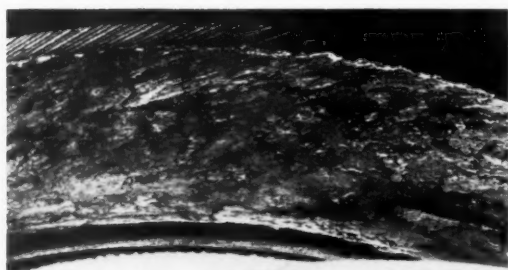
Failed pinion gear tooth surface due to welding after 3 mins. under load with straight mineral gear lubricant. High Torque — Low Speed Axle Test.
